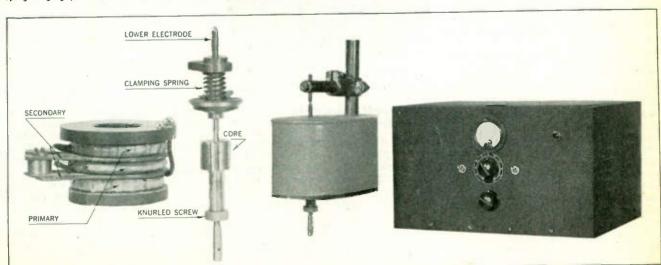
Circuit of capacity discharge welder. Two 28 mfd. capacitors C and C' store the welding energy obtained through Thyratron rectifier. Fig. 2—Details of the welding transformer showing means for developing forging pressure. Control box at right
